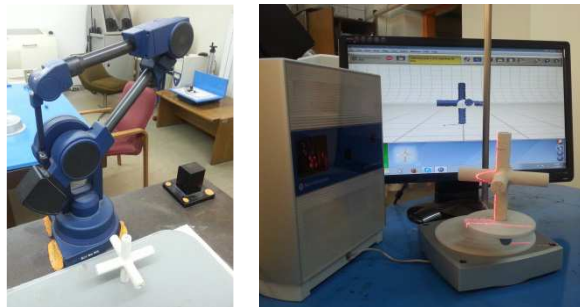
Measurement of dimensional deviation of produced 3DP test samples: a) 3D tactile scanner MicroScribe MX System, producer: Imersion, USA; b) 3D laser scanner Desktop 3D Scanner HD, producer: NextEngine, USA
